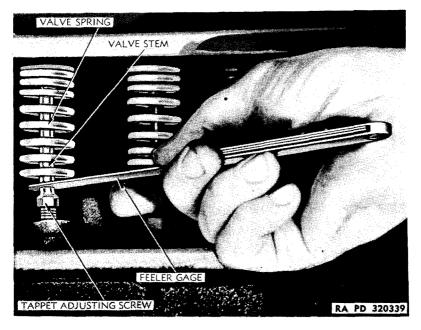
Checking Valve Tappet Clearance, using thickness gage (41-G-400)
